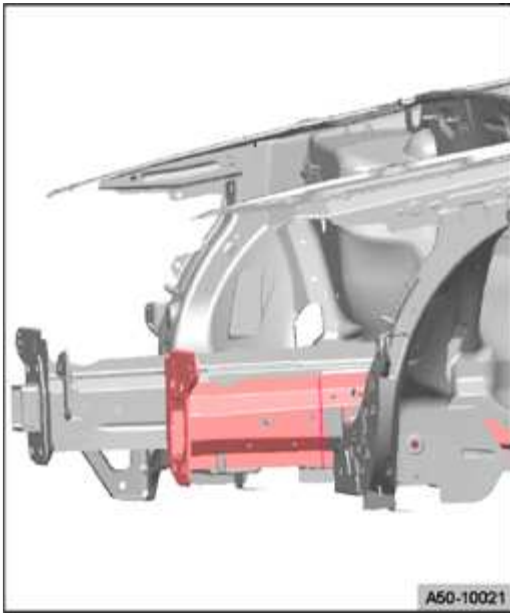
Identifying Separating Cut For Front Longitudinal Member
